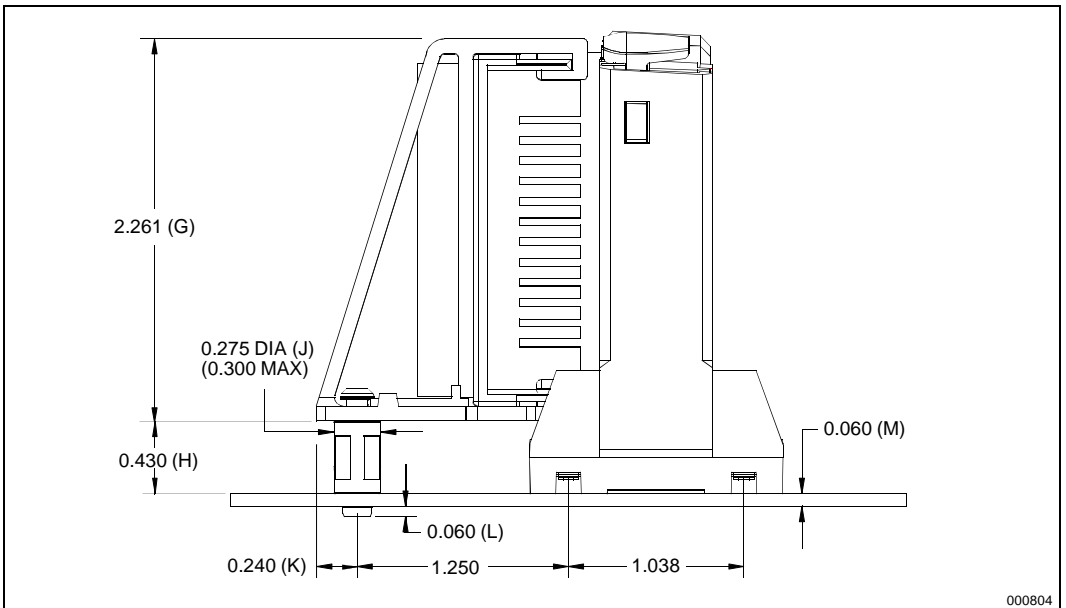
Side View Space Requirements for Boxed Processor Fan/Heatsink Supports
